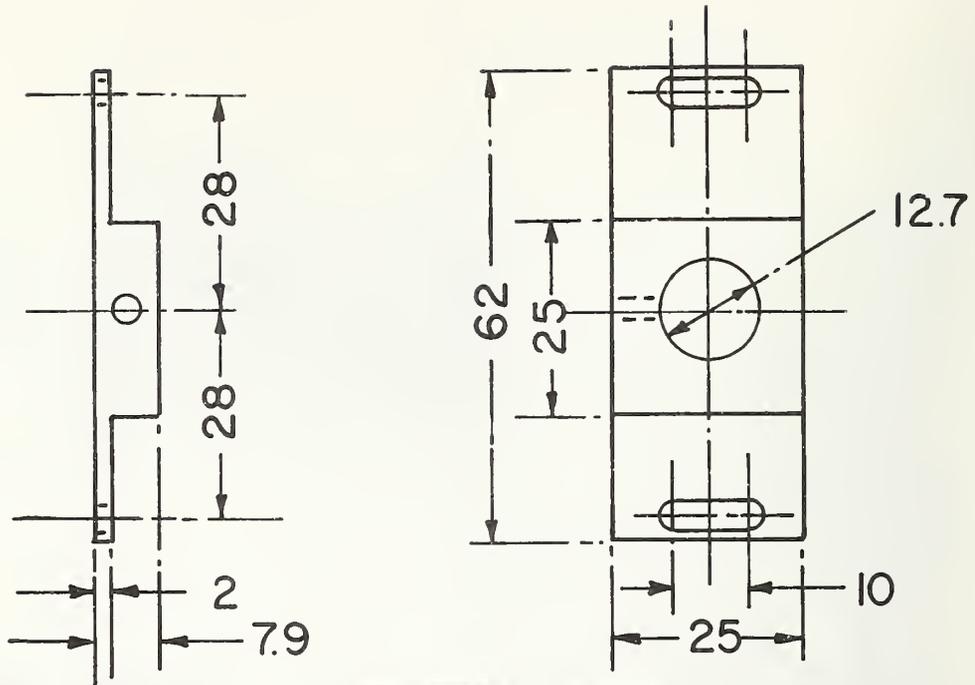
The holder for the horizontal scanning mirror H. Dimensions are given in millimeters.
